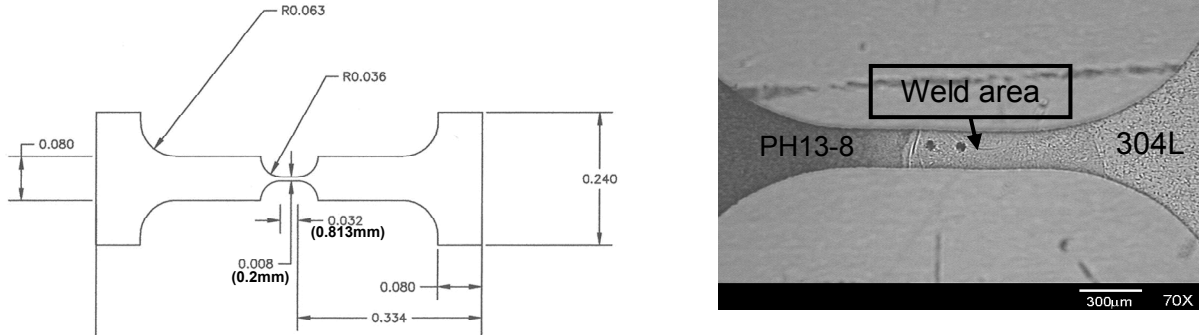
(a) Tensile specimen extracted from the welded area; (b) SEM image of the gage section
